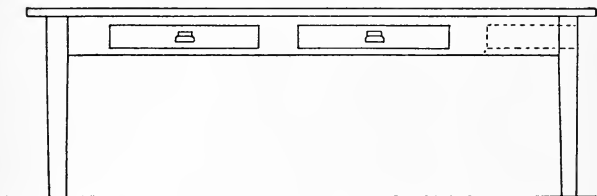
Elevation view of a good form of laboratory table; scale, 1 inch to 2 feet.
